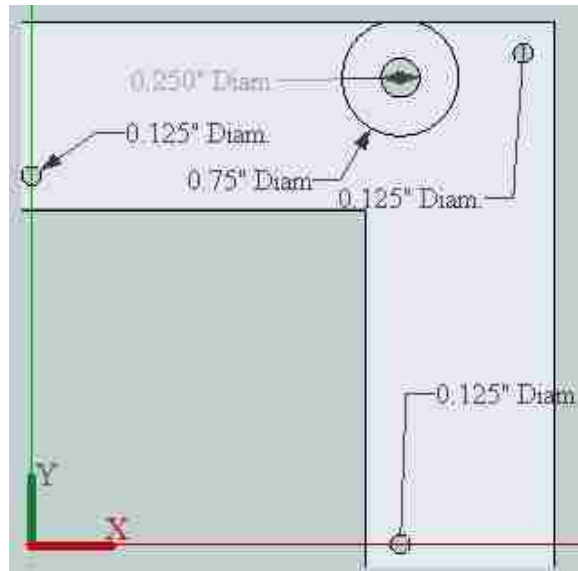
Top view of the 10x10 cm² middle trimmer aluminum plate illustrating hole dimensions.
